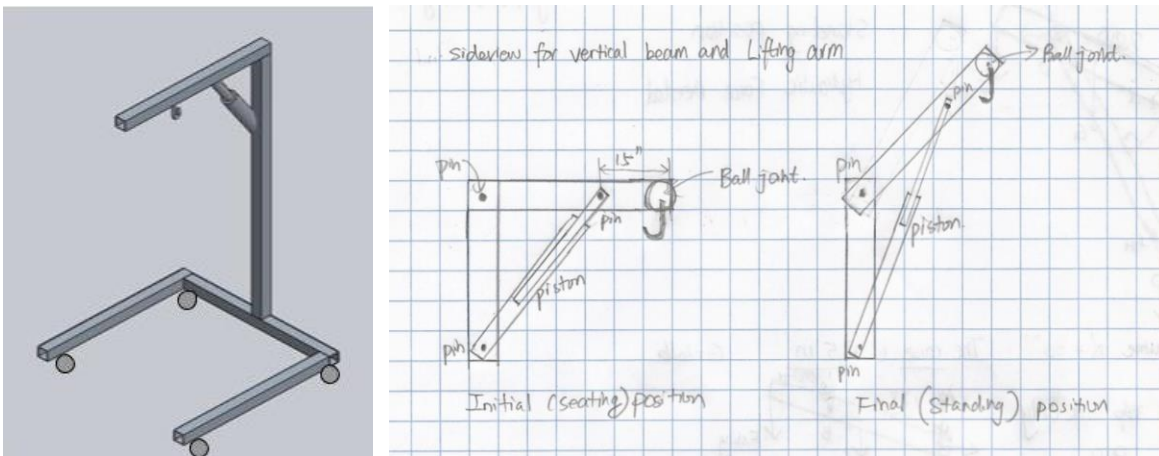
a. Dimensions and Isometric Sketch for Hydraulic Lift (Left) b. Side View of Lifting Mechanism for Preliminary Design 1(Right)
